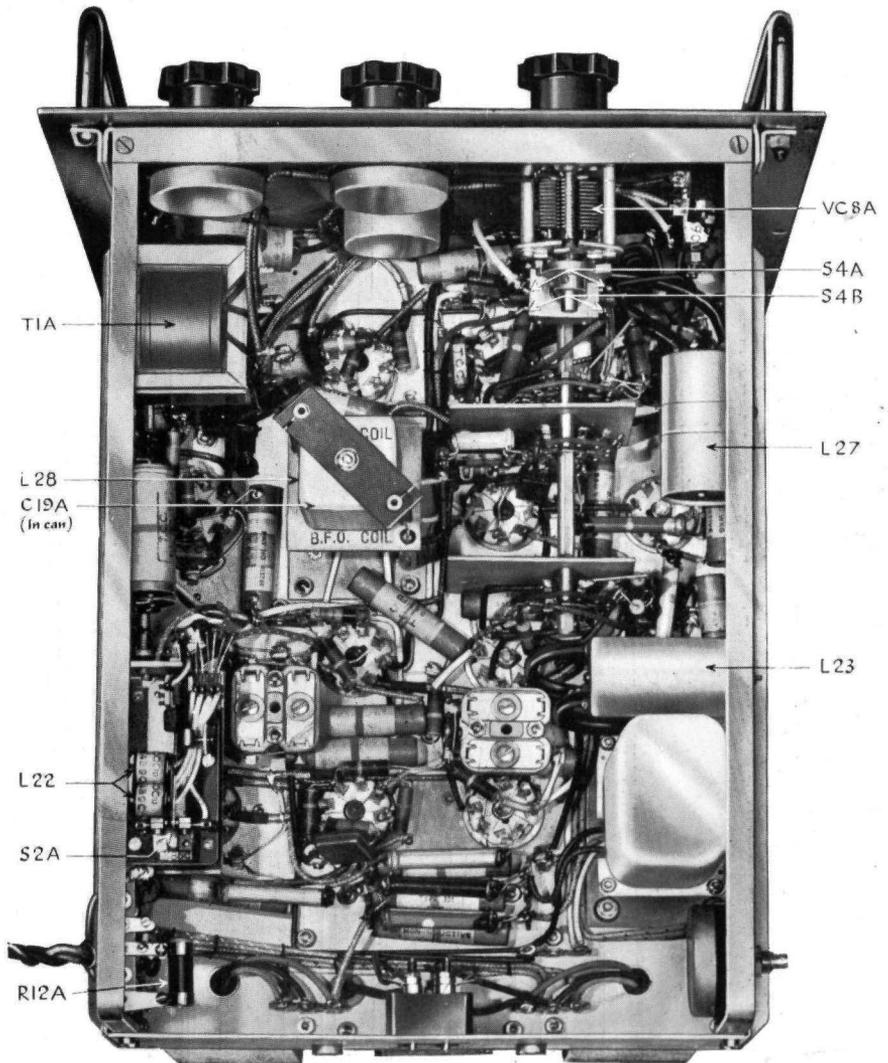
BOTTOM VIEW OF I.F. CHASSIS (Completely Assembled)
